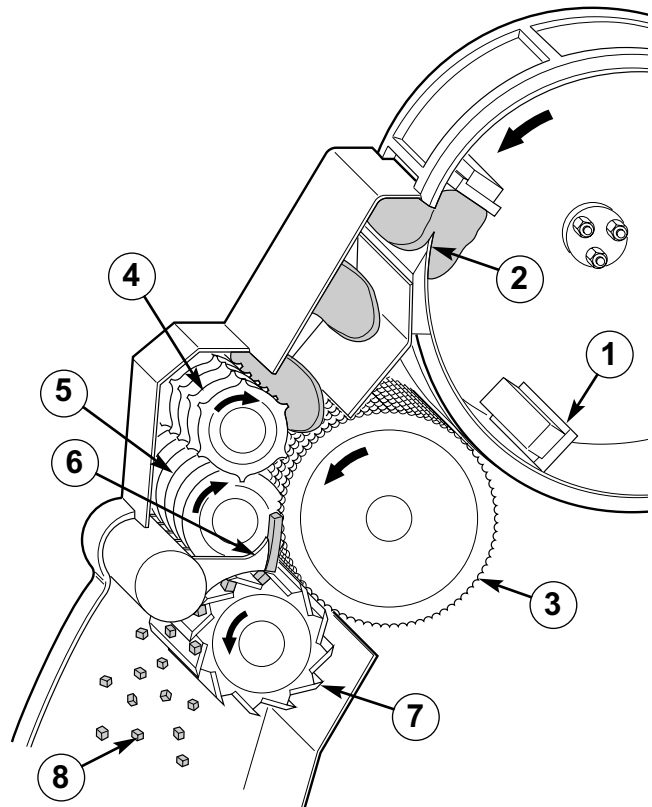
Cutaway view of cutting unit. (1) Impeller, (2) Slicing Knife, (3) Feed Drum, (4) Feed Spindle, (5) Circular Knives, (6) Shear Plate, (7) Crosscut Knives, (8) Product. See chart on page 16 for cutting part speeds.
